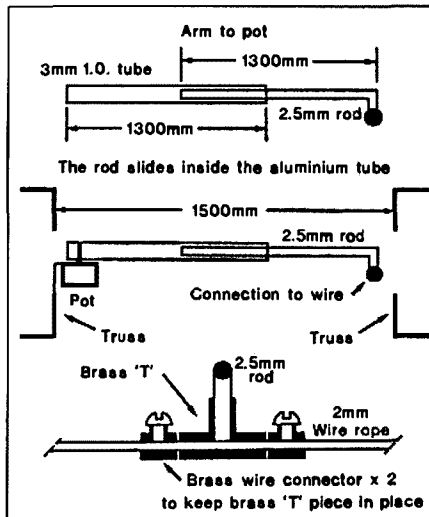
Position Indicator Arm; Position Indicator Arm Mounting; Connection of Position Indicator to Winch Cable. The brass "T" swivels on the wire to compensate for height differences. The brass connectors drive it lengthwise.
